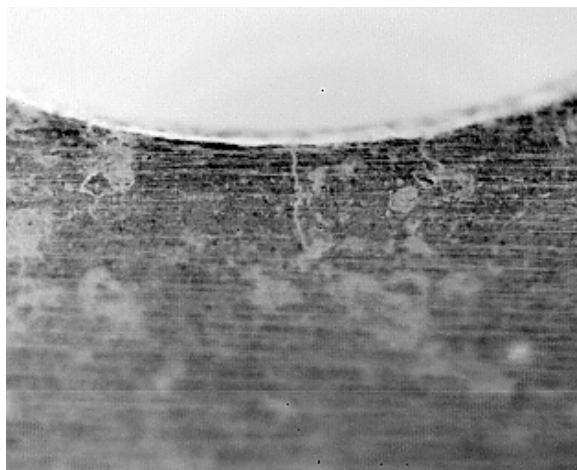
0.030" fatigue crack in 2024 aluminum bar imaged through 3.5 mil primer and topcoat.
